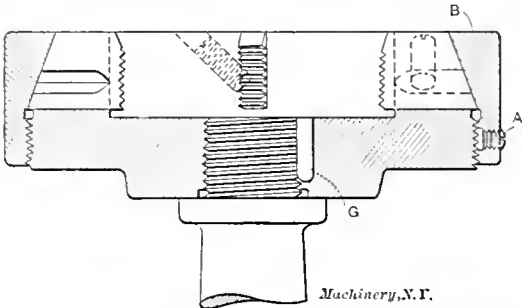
Another Type of Inserted Chaser Die with Removable Blades.
